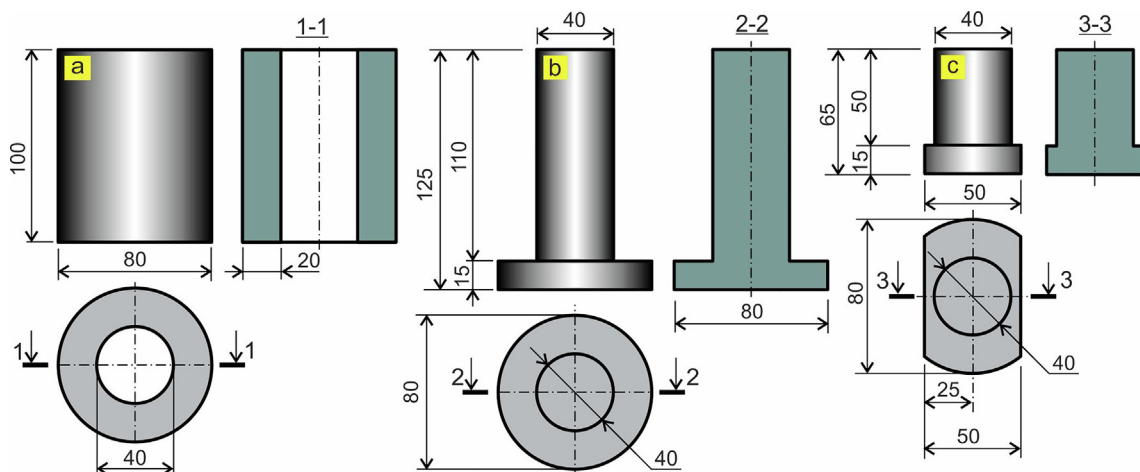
Design of mold for bilateral pressing of ceramic samples: (a) cylindrical matrix; (b) upper punch; (c) lower punch.
